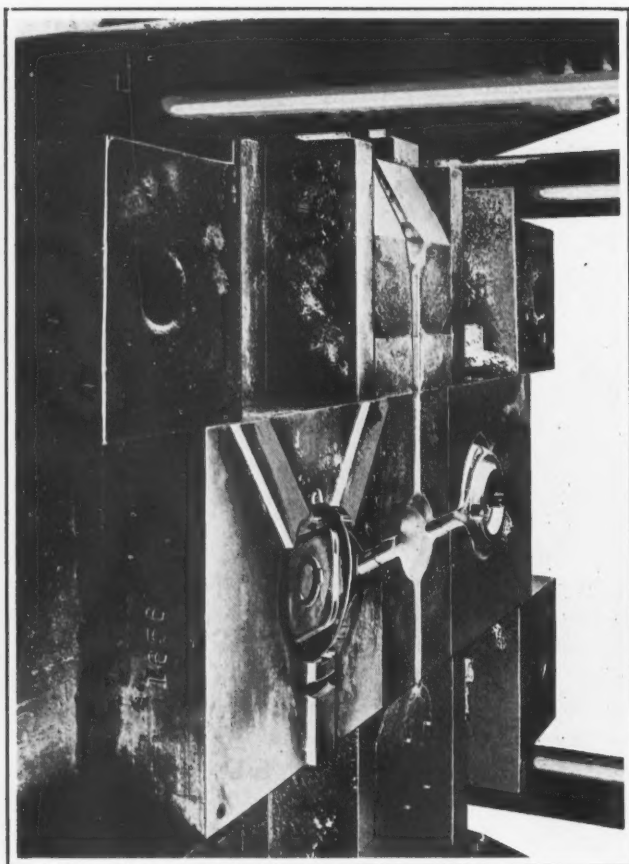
(Left) Rear Half of a Set of Unit Dies and Their Holder. The Front Half is Shown Below. Provision is Made in This Instance for Drawing the Core of the Top Die at an Angle to the Parting Face. A Pair of Die-blocks can be Changed in about Five Minutes
